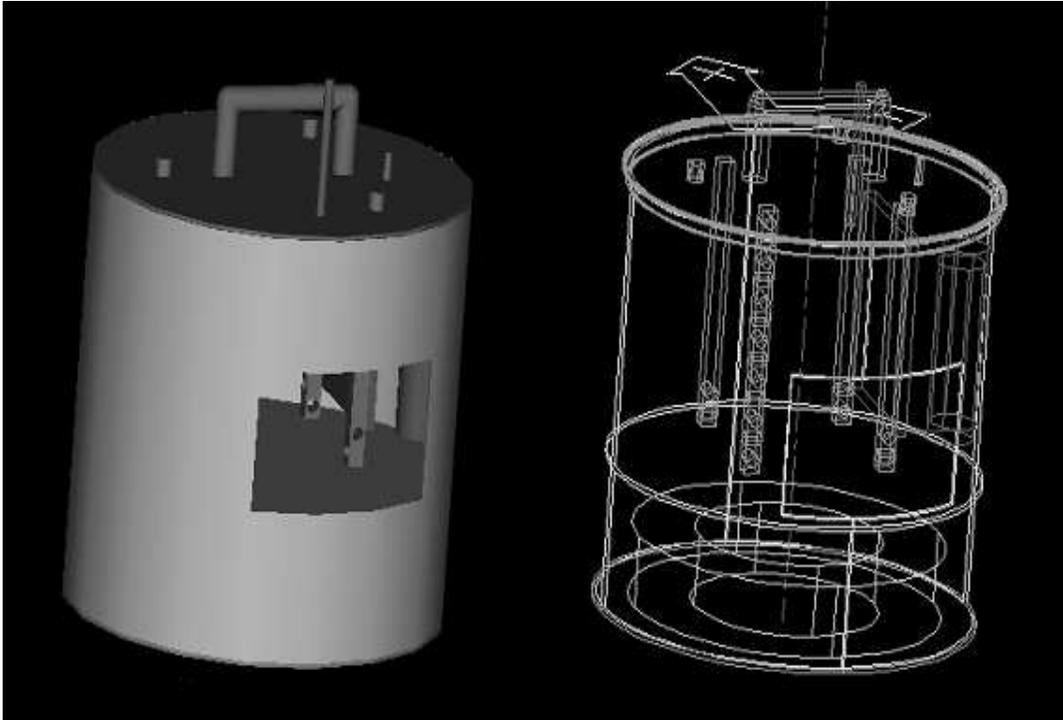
Vehicle assembly with air carriage <GG>
